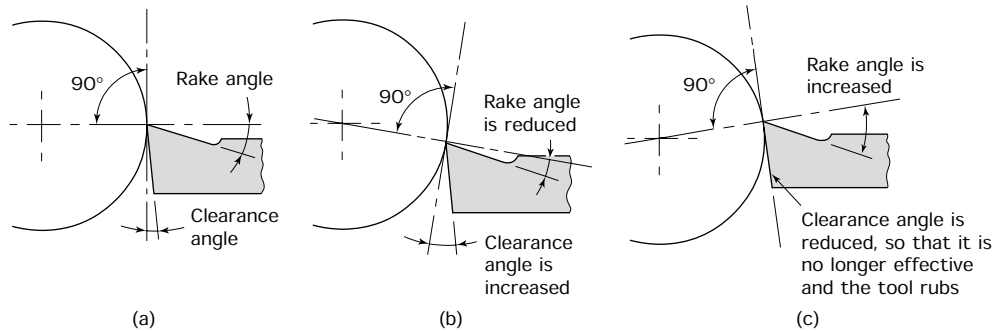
Effect of tool height on lathe tool angles: (a) tool set correctly on centre height; (b) tool set below centre height; (c) tool set above centre height
